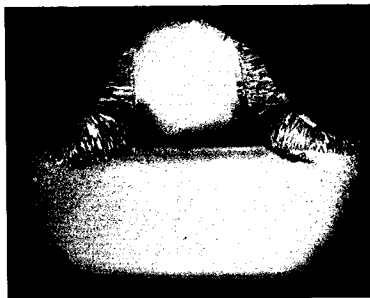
Thermal-fatigue cracking emanating from incomplete welds.
